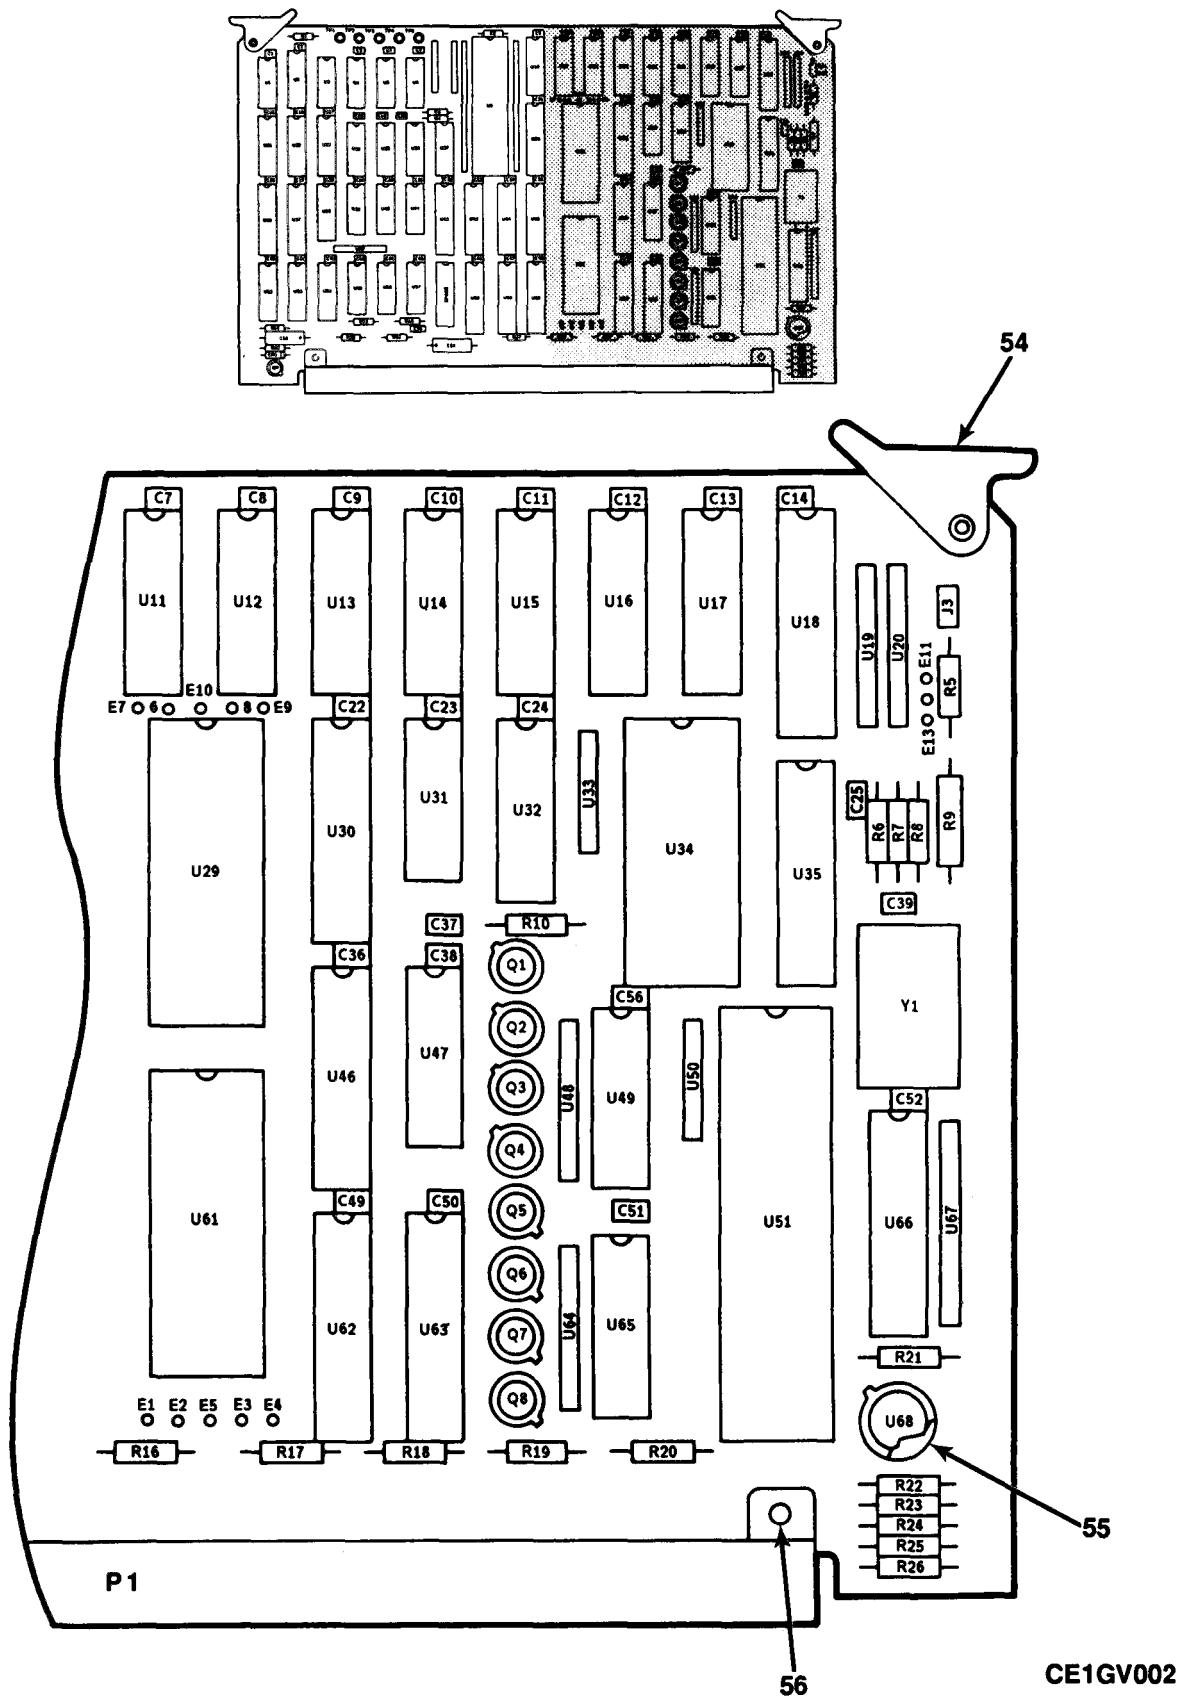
Circuit Card Assembly, Universal CPU (3A1A1) (Sheet 2 of 3).
